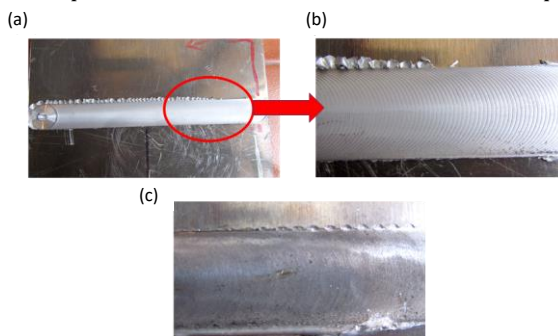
Surface of the sample welded with the T1 tool at rotational speeds and advances of 500 rpm and 500 mm / min, (b) Magnification of the area shown, and (c) Surface of the sample welded with the T1 tool at the rotational and traverse speeds of 500 rpm and 50 mm / min
